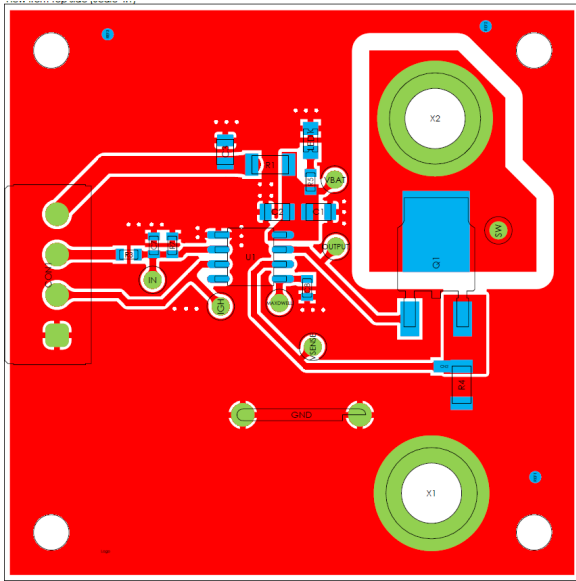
FAD1101AEVB PCB Top Composite Drawing
